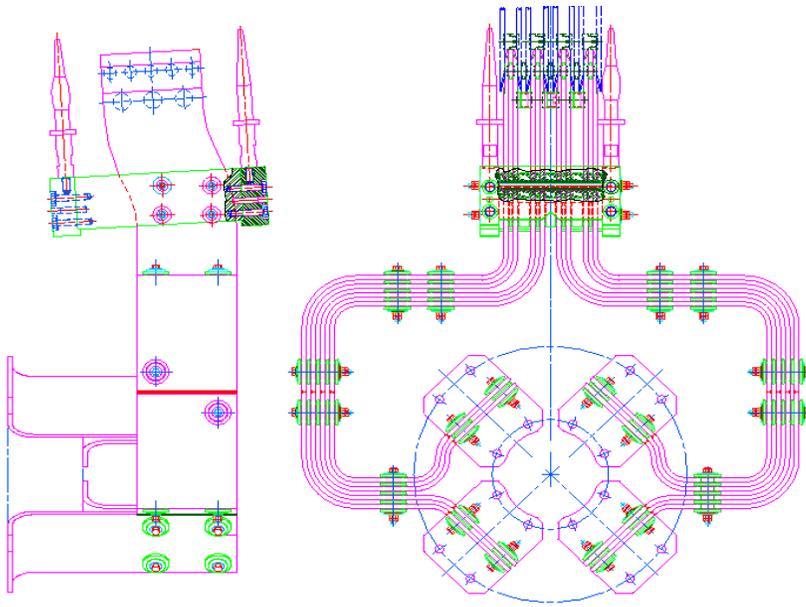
Horn 1 Joint Cross Section and Elevation
